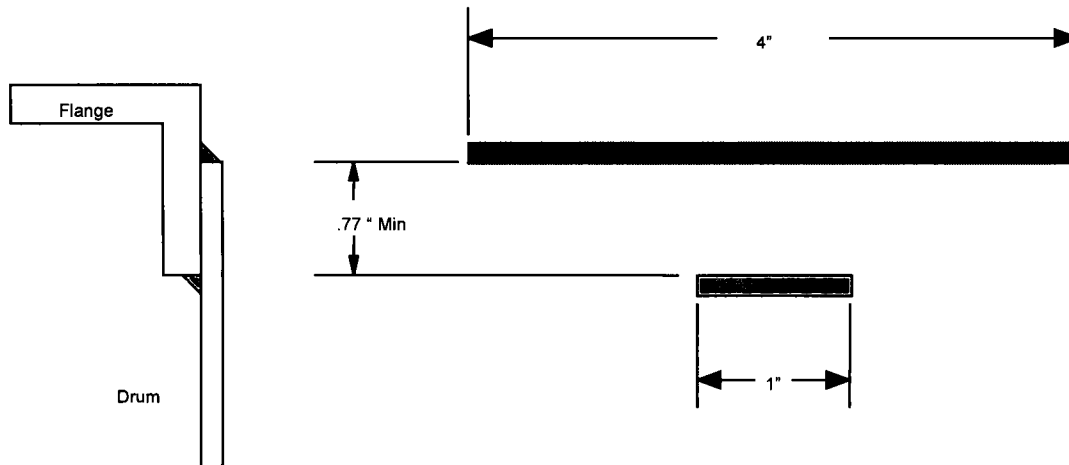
Weld Pattern Around Drum Circumference
